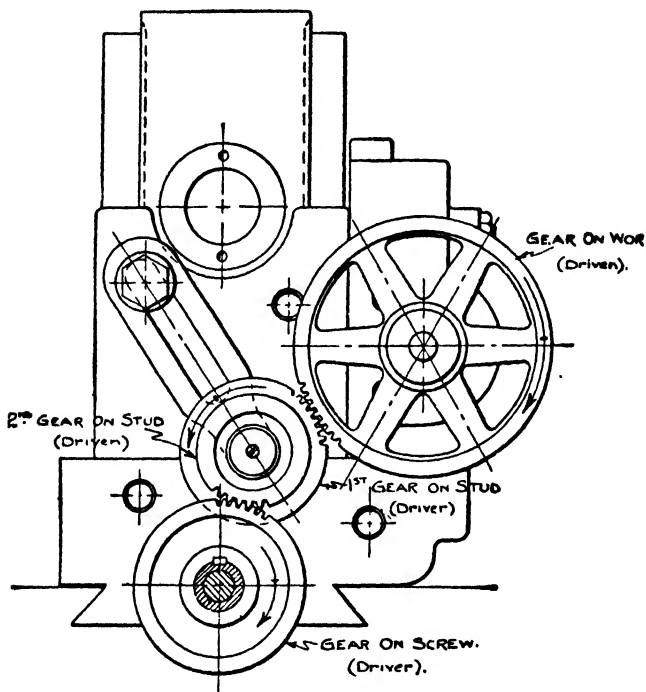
Arrangement of Wheels for Right-Hand Thread.
